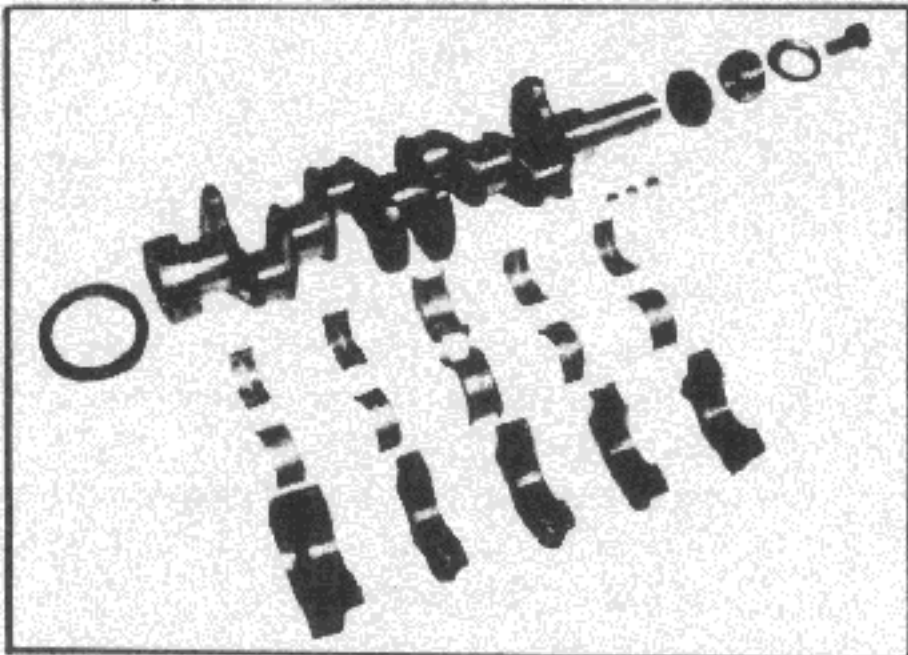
Main bearings and caps for L13 and L16 engine
